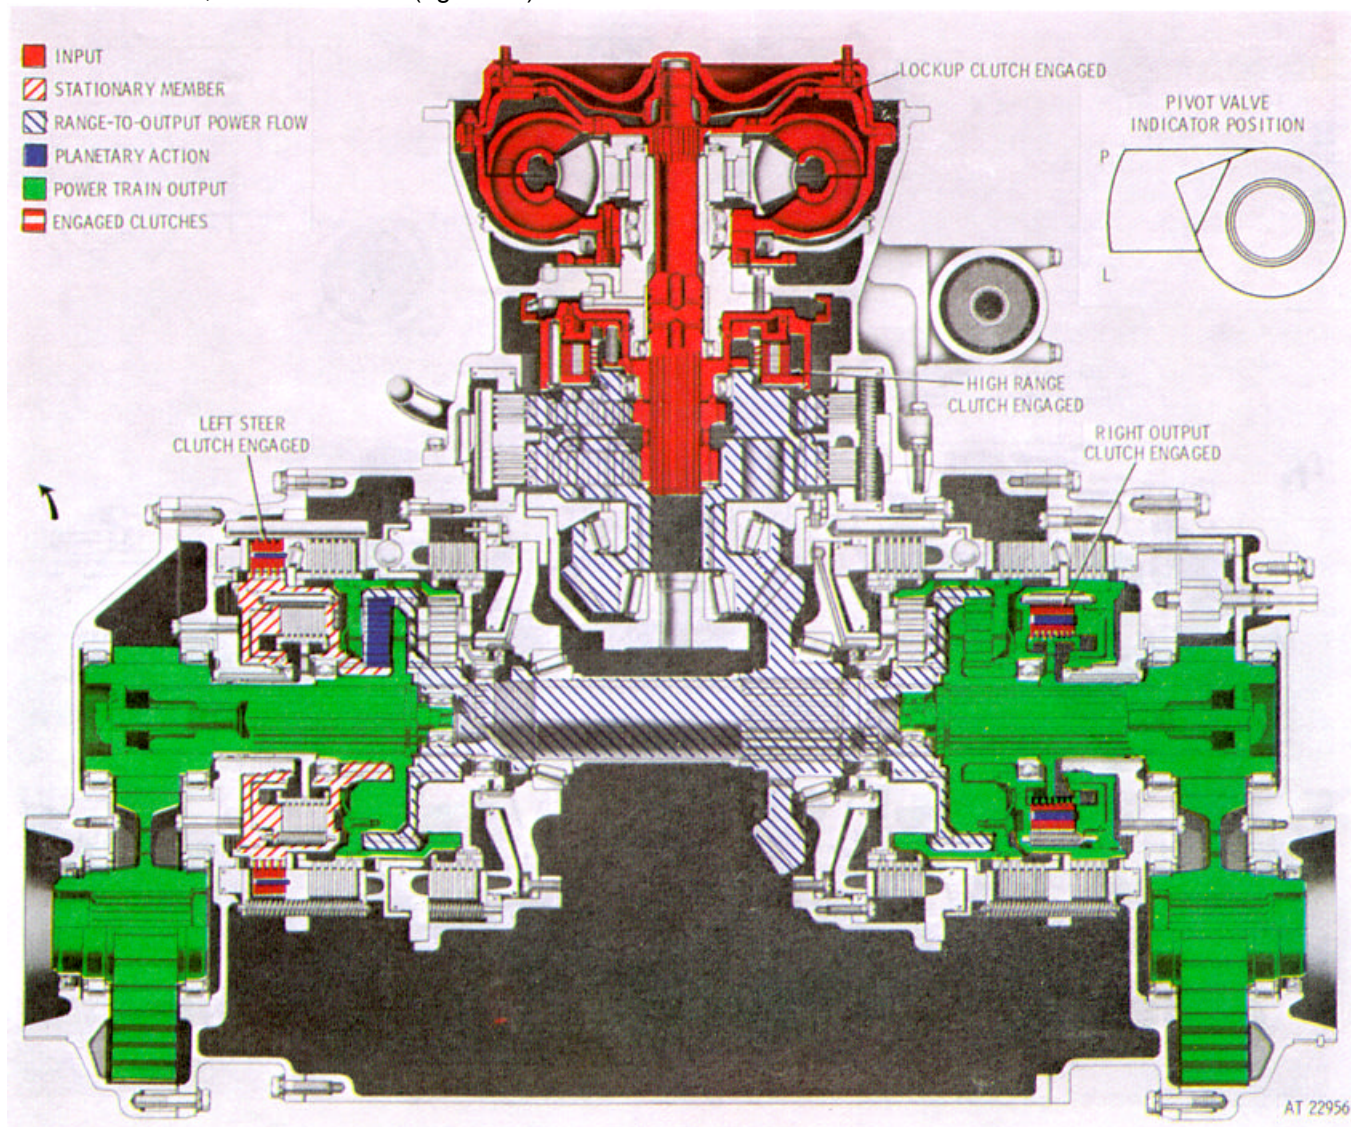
Fourth gear, pivot left steer operation-torque path.
